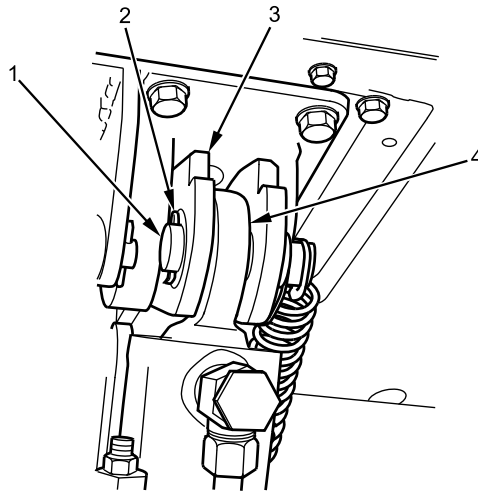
Hydraulic Cylinder Upper Lockpin Shaft and Cotter Pin.
